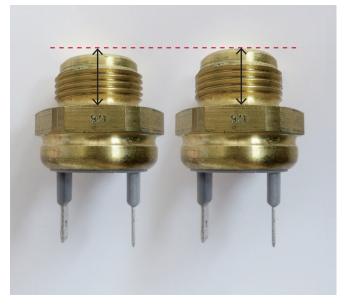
Different thread length due to excessive assembly torque, original condition on the left, and elongated due to excessive assembly torque on the right.
